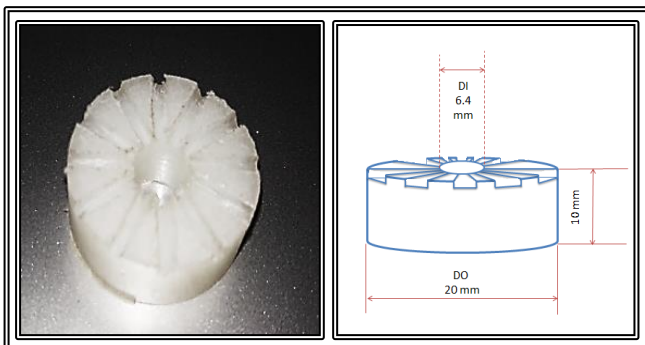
Schematic design for the dimensions of TFE-fluorocarbon crevice washers
